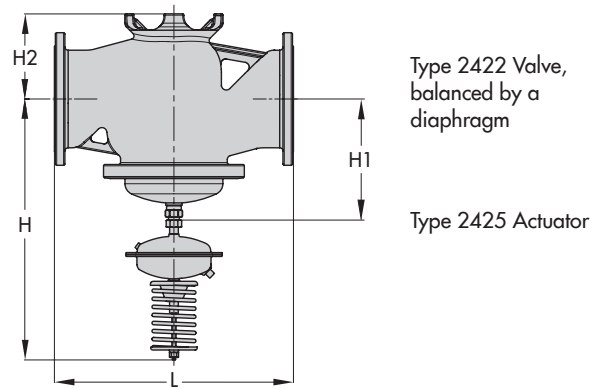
Dimension drawing of Type 2422 Valve balanced by a diaphragm with Type 2425 Actuator
